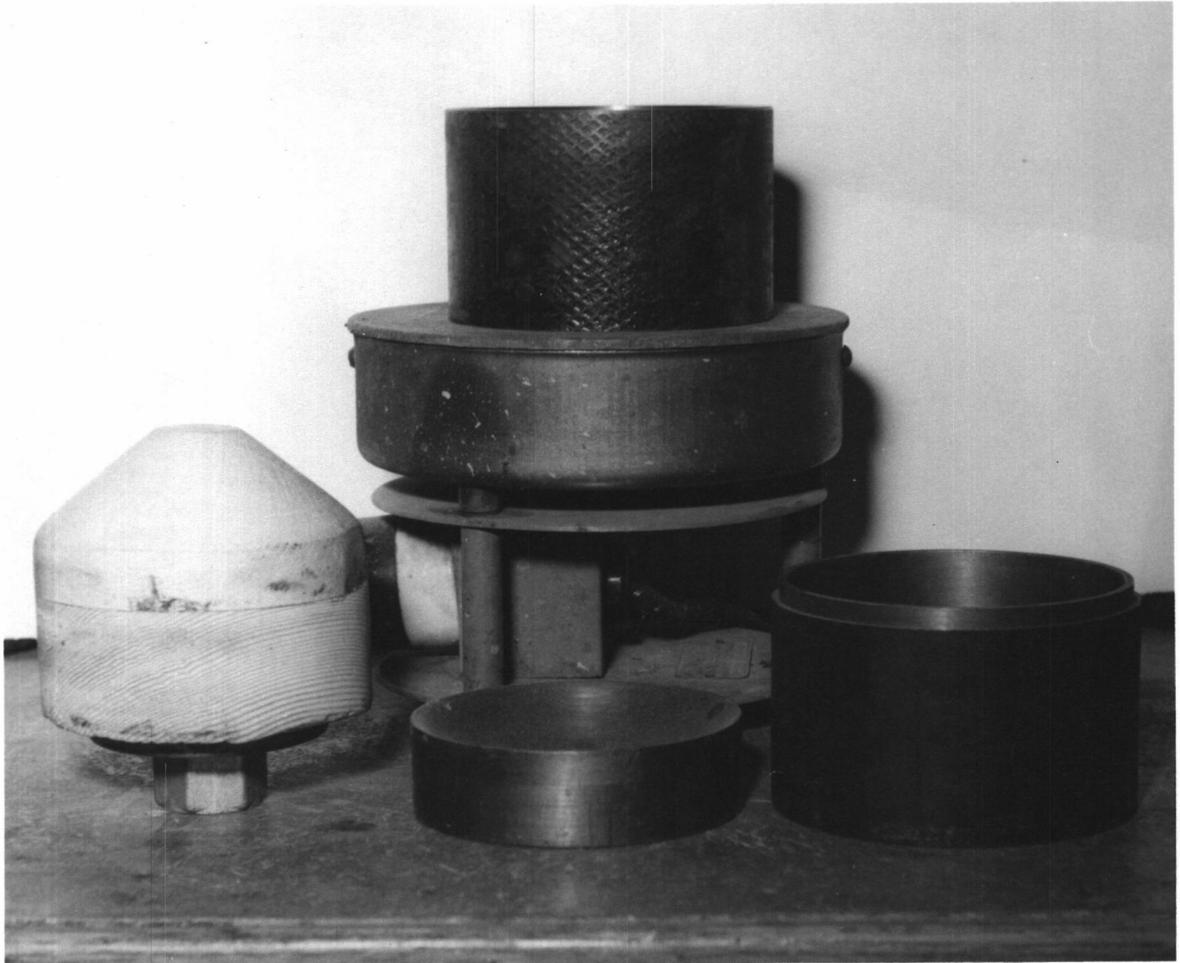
Bottom row: hardwood preforming plug, female die and chase. Top: chase extension on hot plate.
